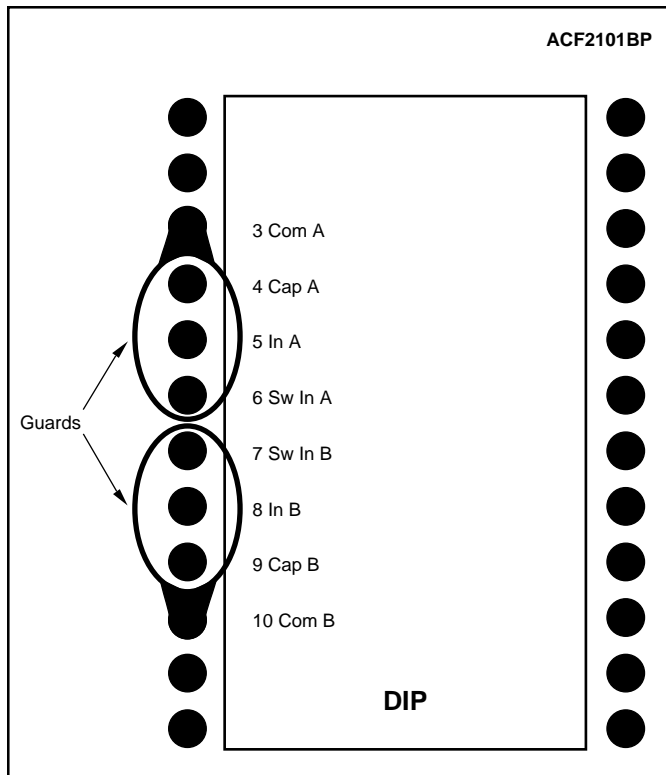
PC Board Layout Showing "Guard" Traces for Input, DIP. Both top and bottom of board should be guarded.
